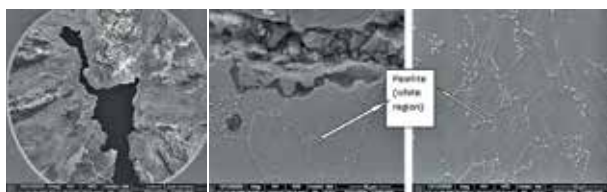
Fracture surface; pearlite depletion near crack tip due to overheating.
